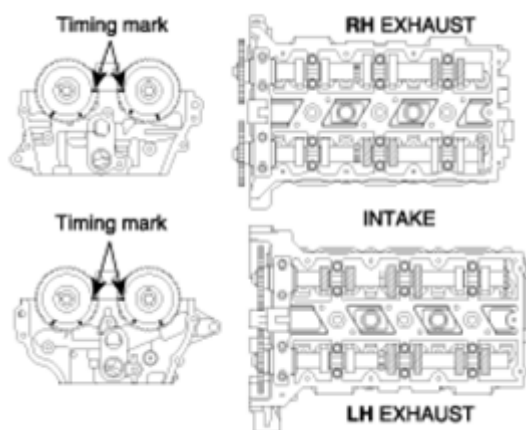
Identifying Timing Marks And Valve Clearances (No. 4 Cylinder At TDC)
